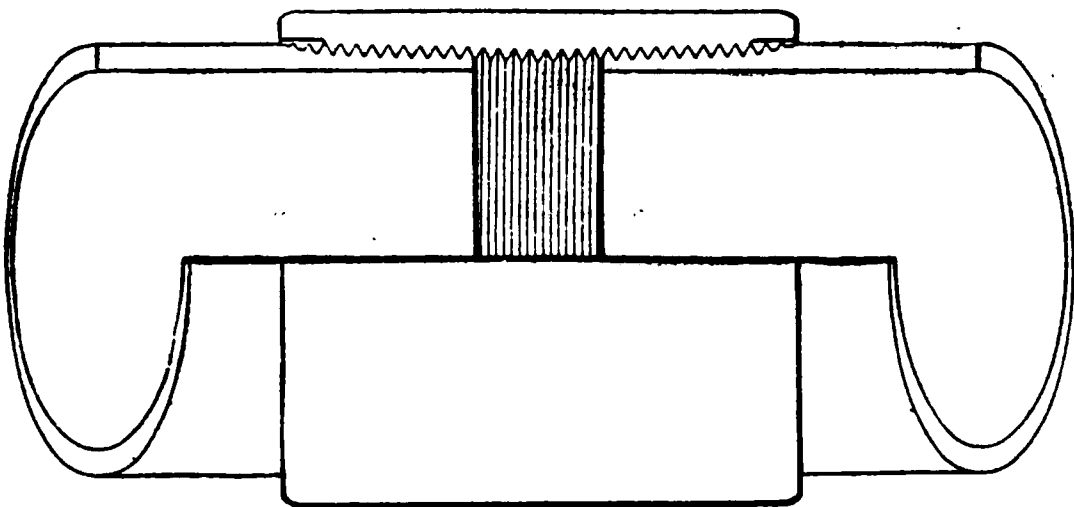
Typical Section of Reamed and Drifted Pipe Coupling and Joint
